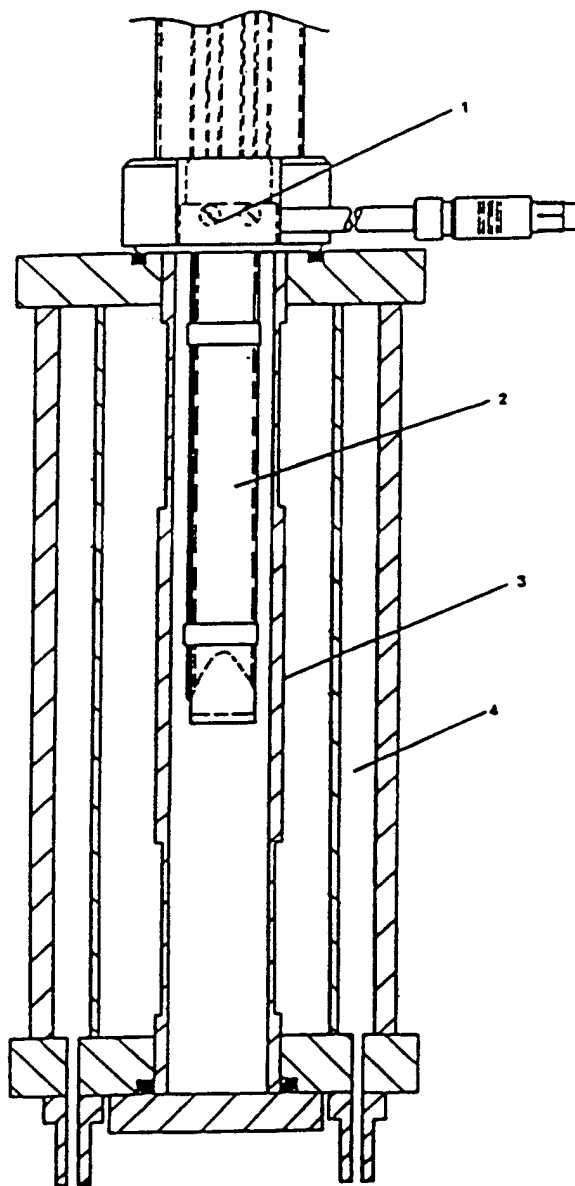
Sectional Drawing of TMA Furnace Assembly and Probe Assembly
